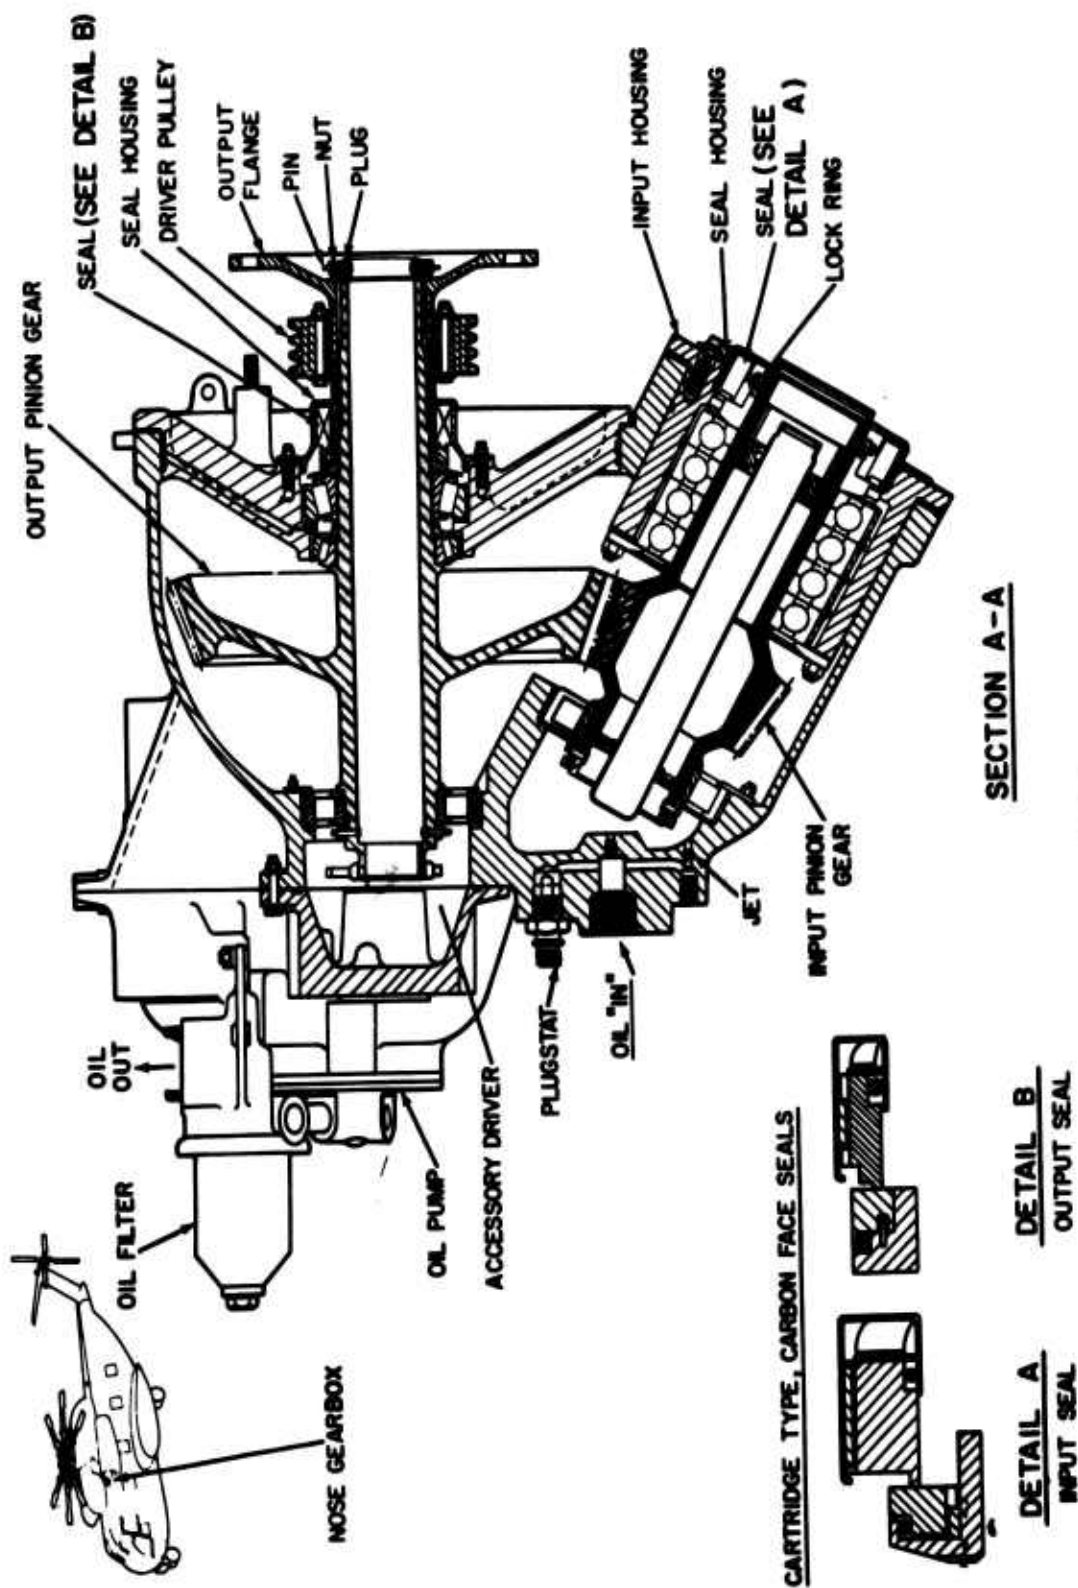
CH-53 Nose Gearbox Assembly - Cutaway
